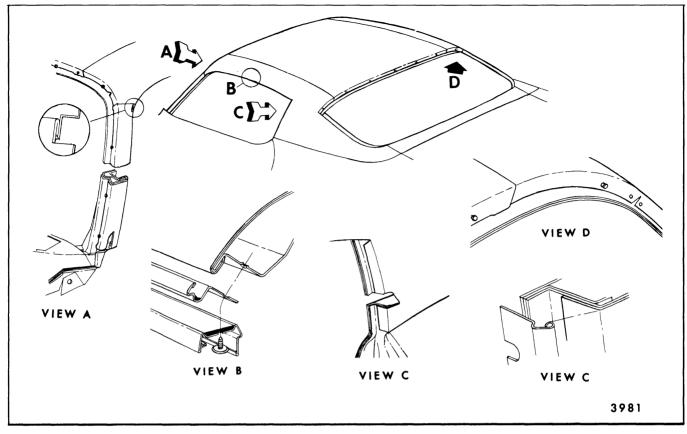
Typical Fabric Roof Cover Installation Without Roof Panel Moldings - "F" Styles
